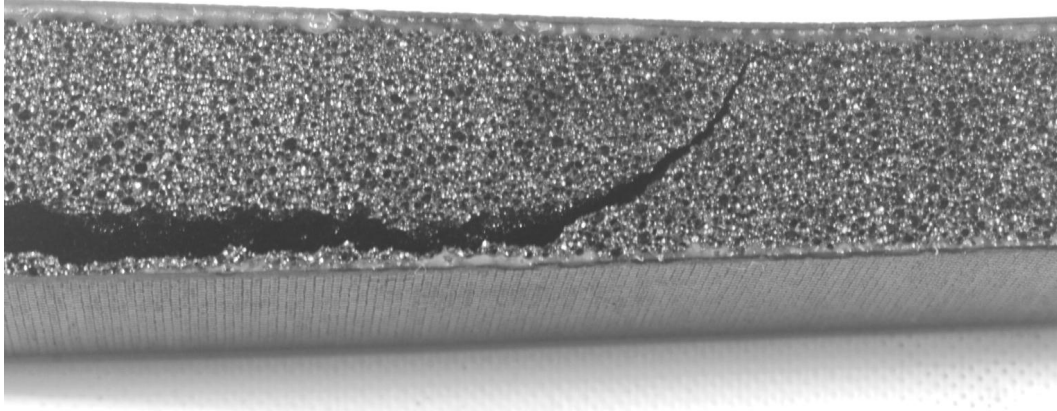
Failure Due to Peeling Stress Along Core/Face Sheet Interface (2×) (Specimen 3)
